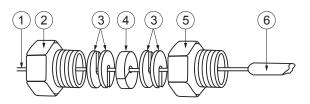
Duct flange to be used with closed-tank connector FTG13A-600R
